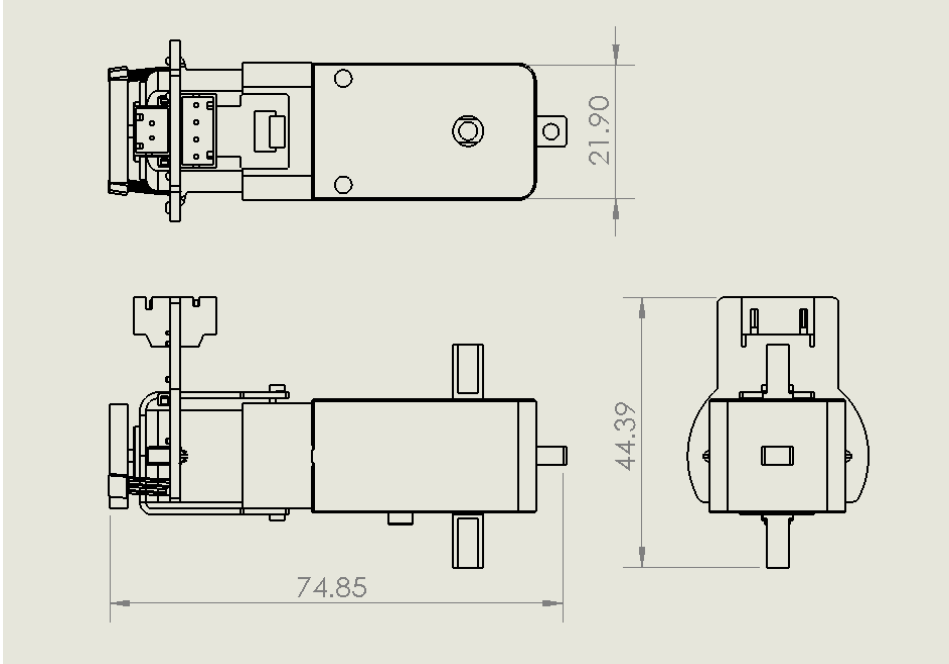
Drawing of the DFRobot DC gear motor with encoder.
